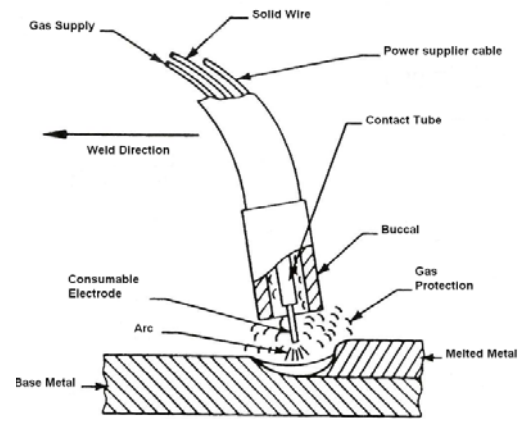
Operating principle of MIG / MAG welding [7]
